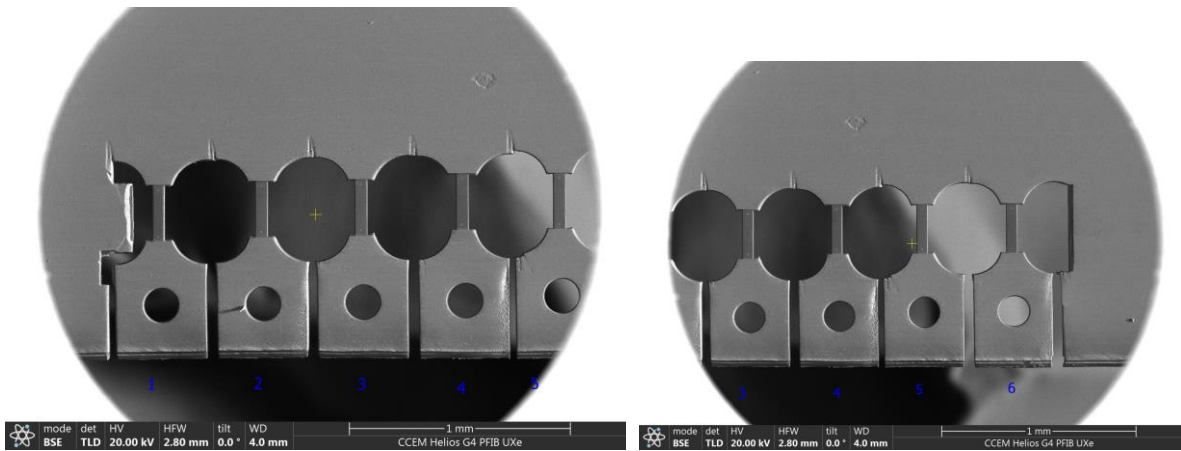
Line up of PFIB- machined copper micro-tensile specimens after fabrication process for wedge 3.
